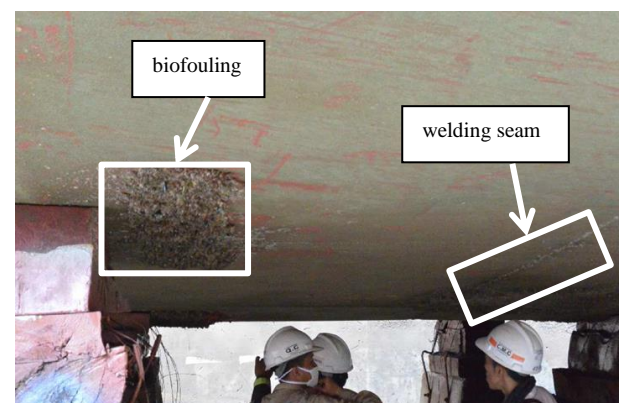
Biofouling from previous dry-docking cycle that were not cleaned due to inaccessible caused by the docking blocks and welding seam.
